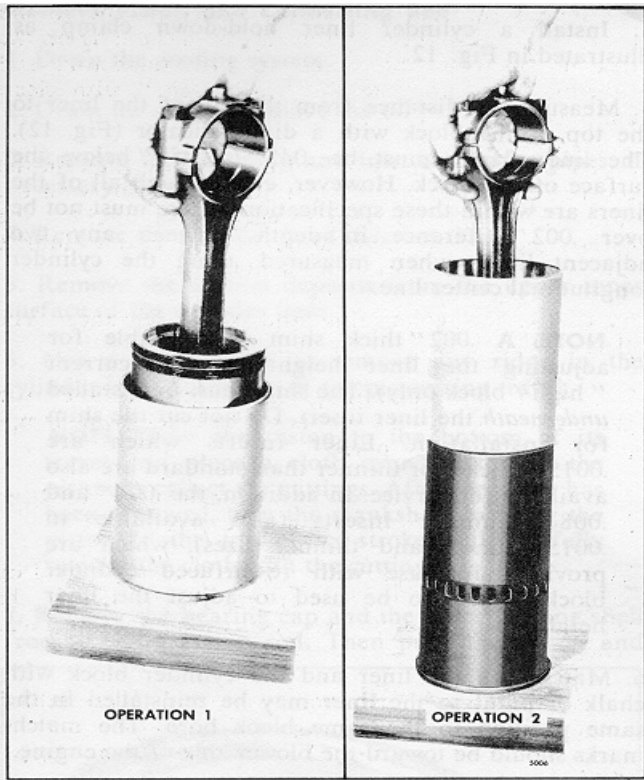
Installing Piston and Connecting Rod Assembly in Ring Compressor and Cylinder Liner
